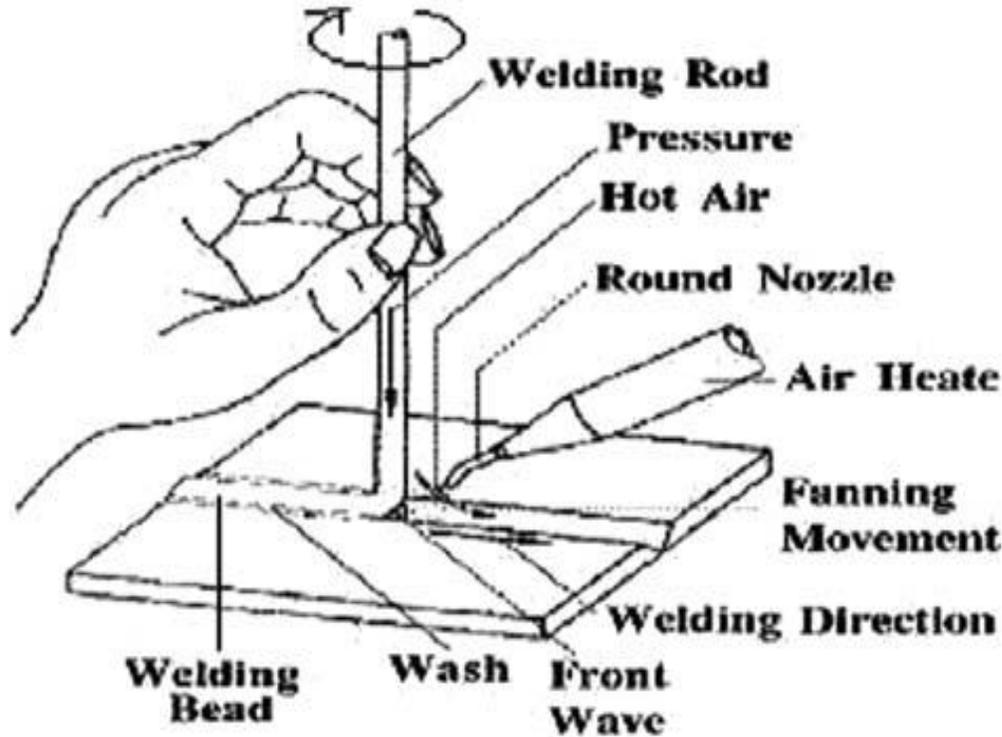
Schematic of hot gas welding, showing the correct position of torch and filler rod for plastic.
